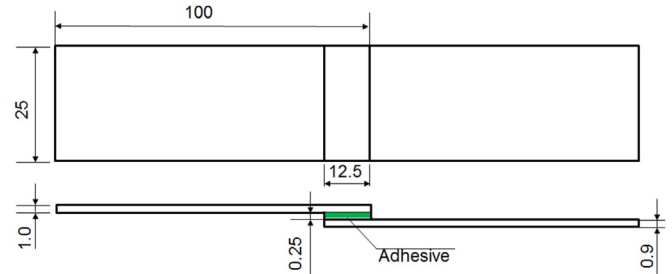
Configuration of adhesive-bonded lap-shear joint (dimensions in mm).
